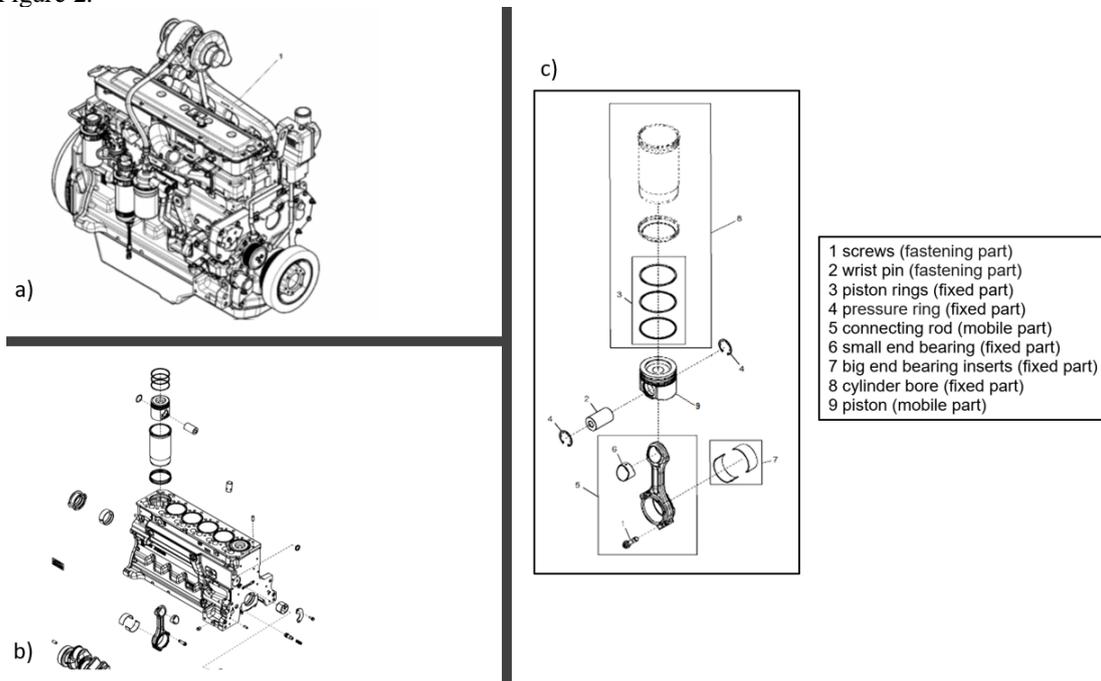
a) Diesel Engine 88 kW (120 hp); b) disassembled engine block;
